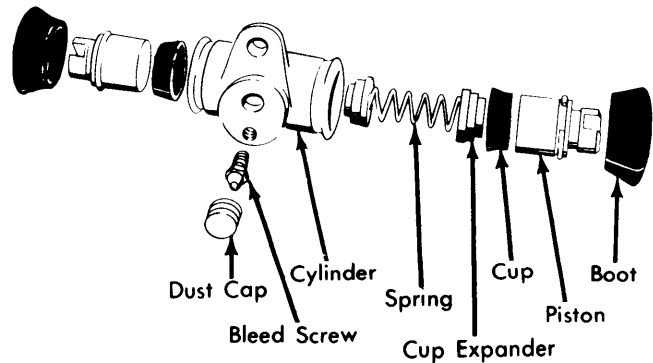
Volkswagen Type 1 Wheel Cylinder Assembly
